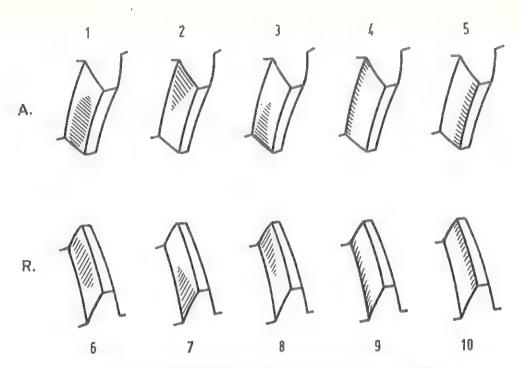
Transmission bevel pinion and ring gear tooth bearing.
